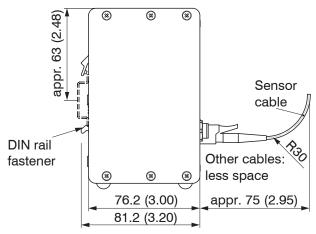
Dimensional drawing, side view of IMC5x00 controller, dimensions in mm (inches)
